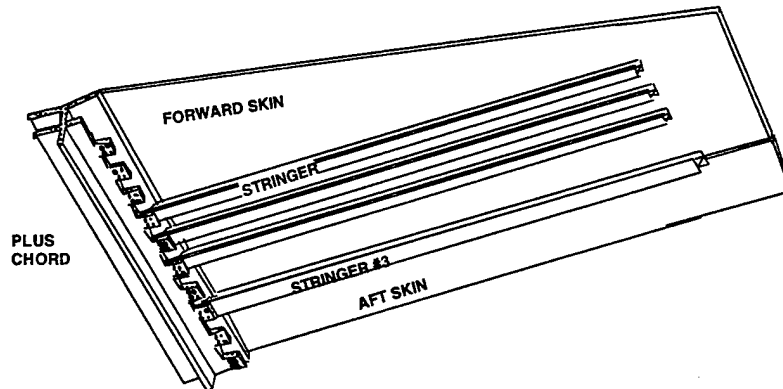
Skin assembly shown from the lower view. Note, this is a left upper skin; the right upper skin is symmetric.
